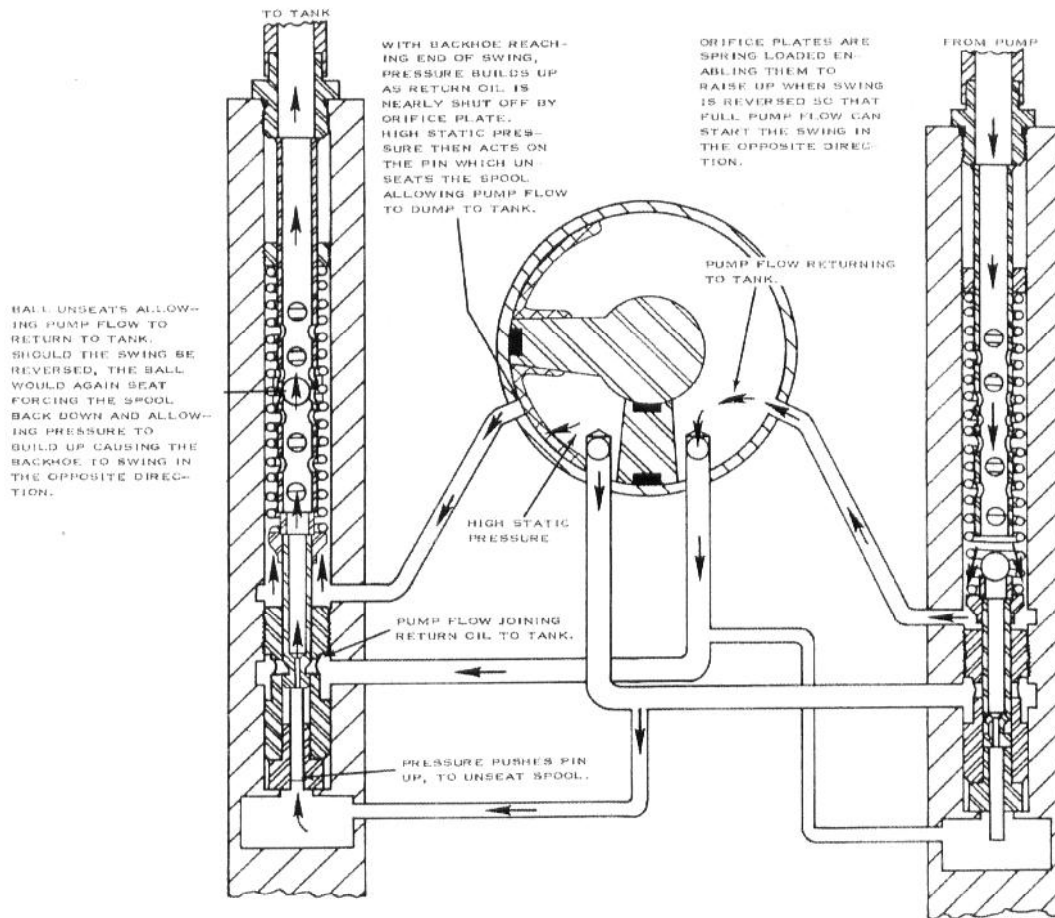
Swing Cushioned (Inlet Oil Bypassed to Return) —
